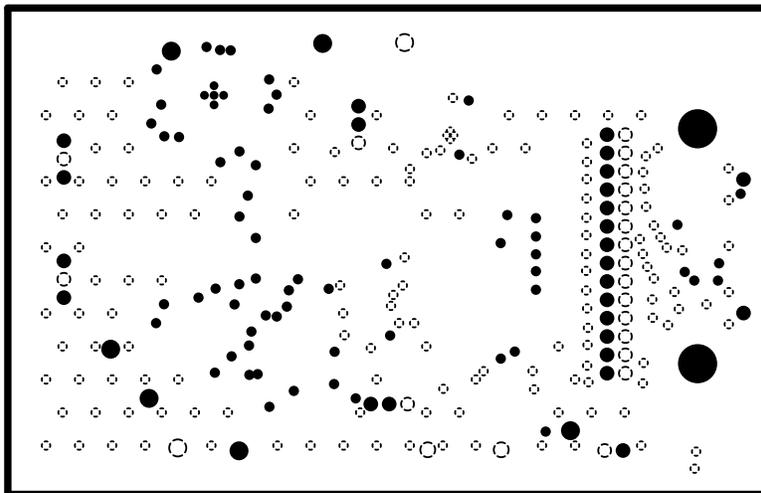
PCB Layout for the ADS1282EVM (Internal GND Plane)
